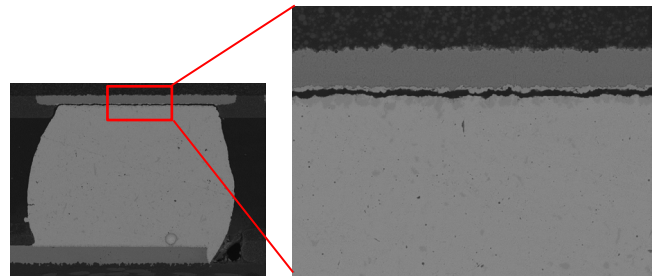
Cross-section image of a solder joint failed during board level drop test (No lid, SA-3)
